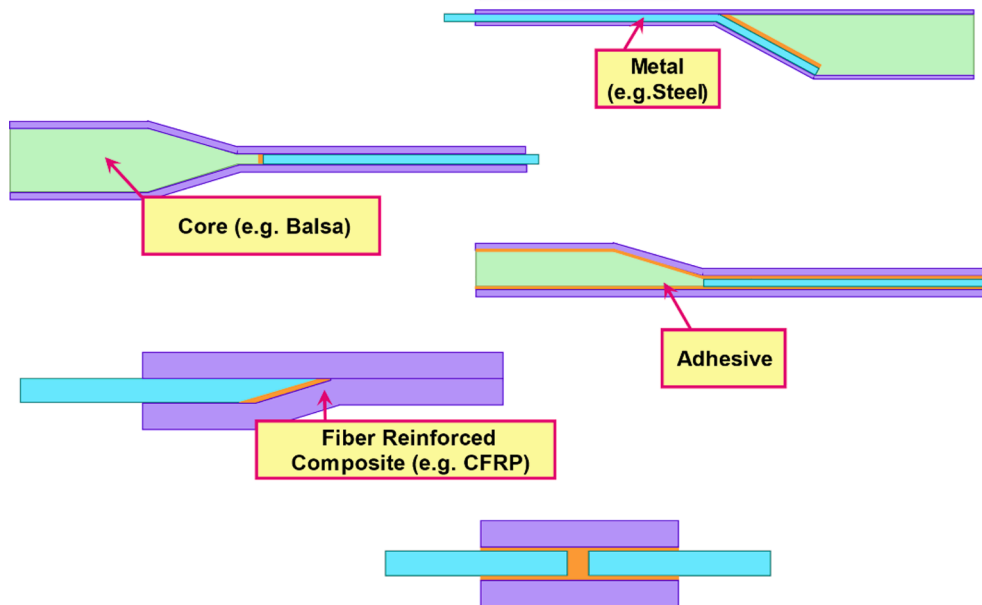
Typical configurations of adhesively bonded butt joints in marine applications (adapted from [58,71-73]).
